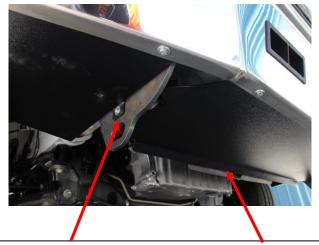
Share same bolt for rear hole. Flange to bottom on centre.
